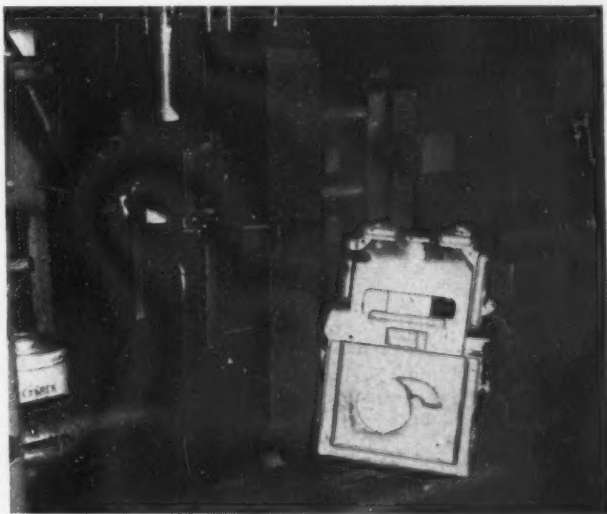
Close-up View of the Moving Die Member for the Enlarger Base Casting, Mounted on the 1,000-ton Machine
